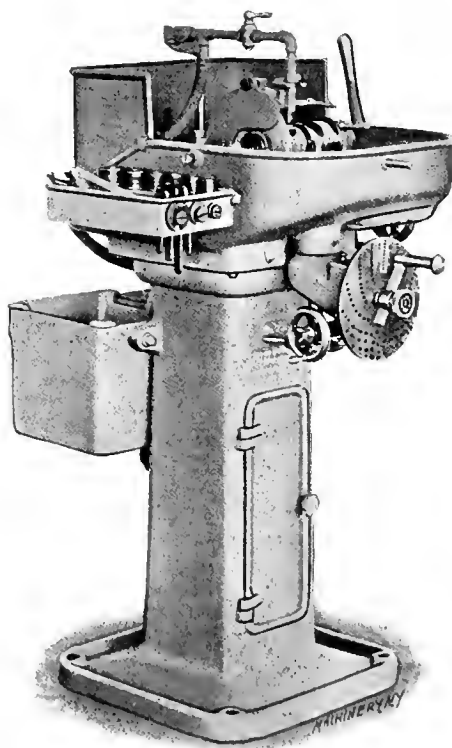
Brown & Sharpe Wet Grinder for Formed Gear-cutters.
